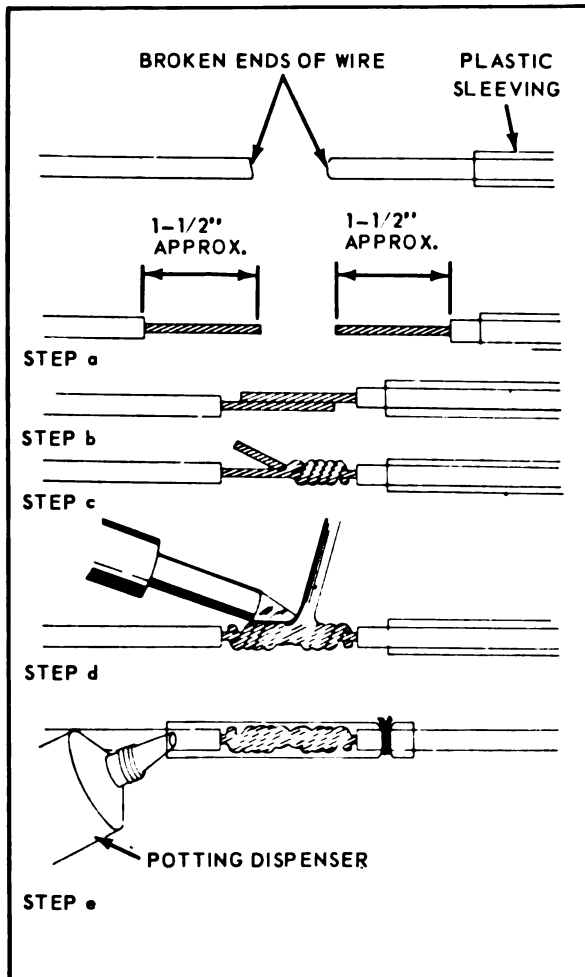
Repairing Broken Wire by Soldering and Potting
